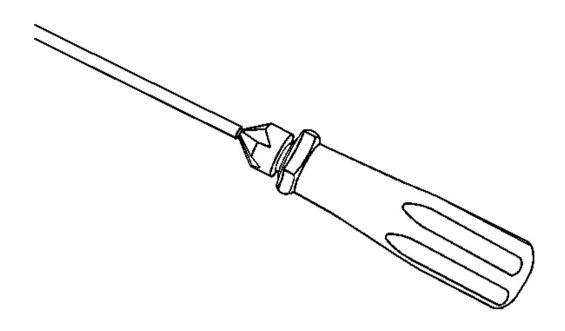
Chamfering Pipe Using De-Burring Tool Courtesy of GENERAL MOTORS CORP.
